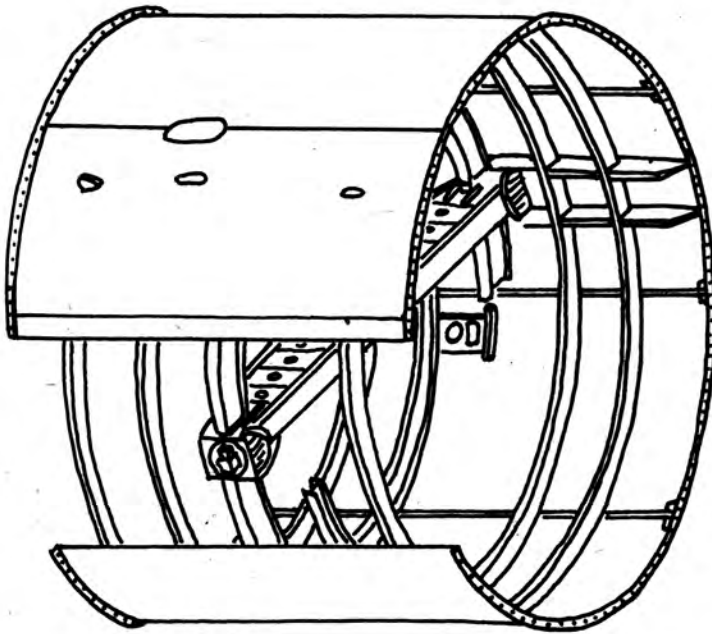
Intertank assembly with thrust panel cut away to show SRB thrust beam.
